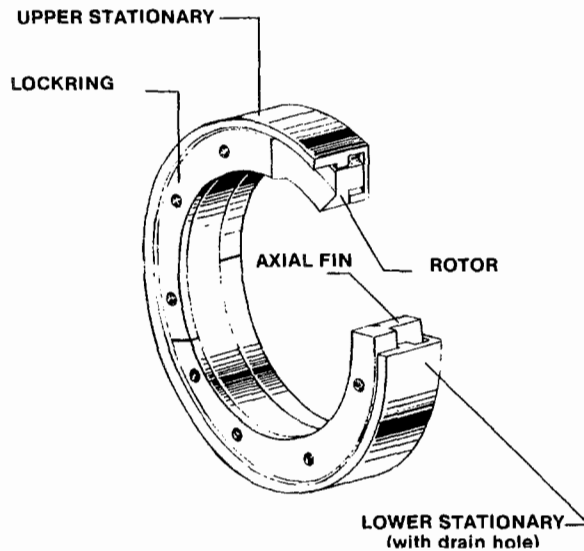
Air-purged bearing housing labyrinth for large steam turbines.
